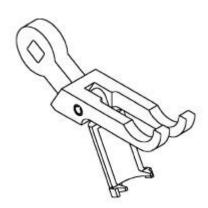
INSERT, CRANKSHAFT - 8513A Courtesy of CHRYSLER LLC
